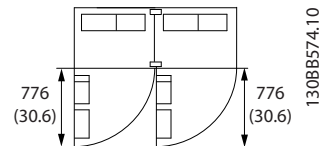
Space in front of IP21/IP54 enclosure type, frame size F10
